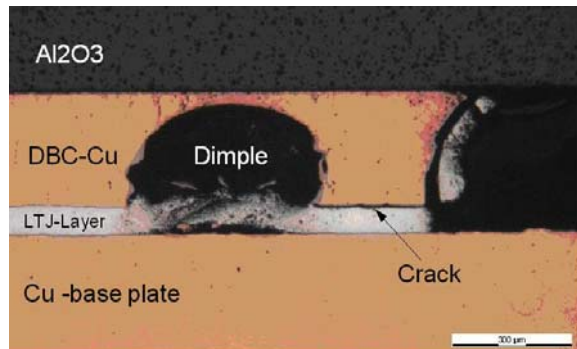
Cross-section of the sample edge with about 50 µm LTJ-layer thickness
